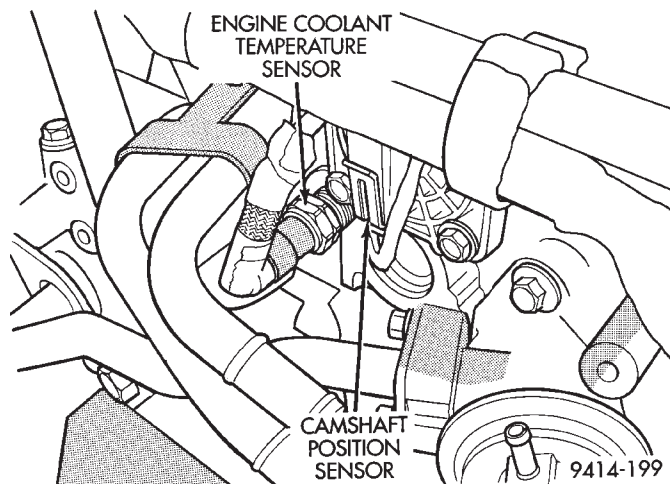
Engine Coolant Temperature Sensor Location—SOHC
